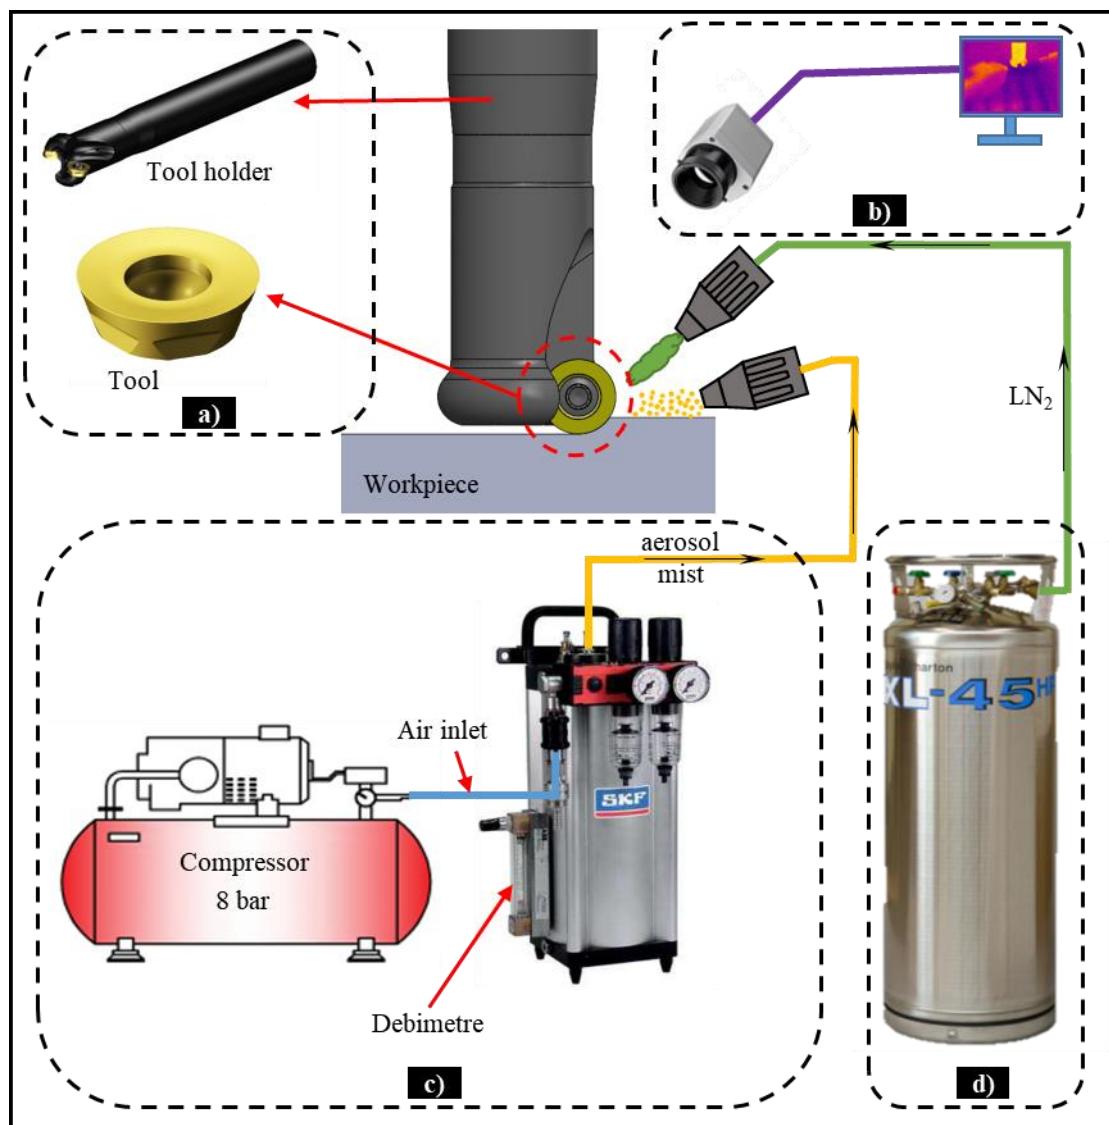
Experimental setup, a) Cutting tool and tool holder, b) Thermal imager, c) MQL system, d) Cryogenic cylinder (Deney düzeneği, a) Kesici takım ve takım tutucu, b) Termal kamera, c) MQL sistemi, d) Kriyogenik silindir)
